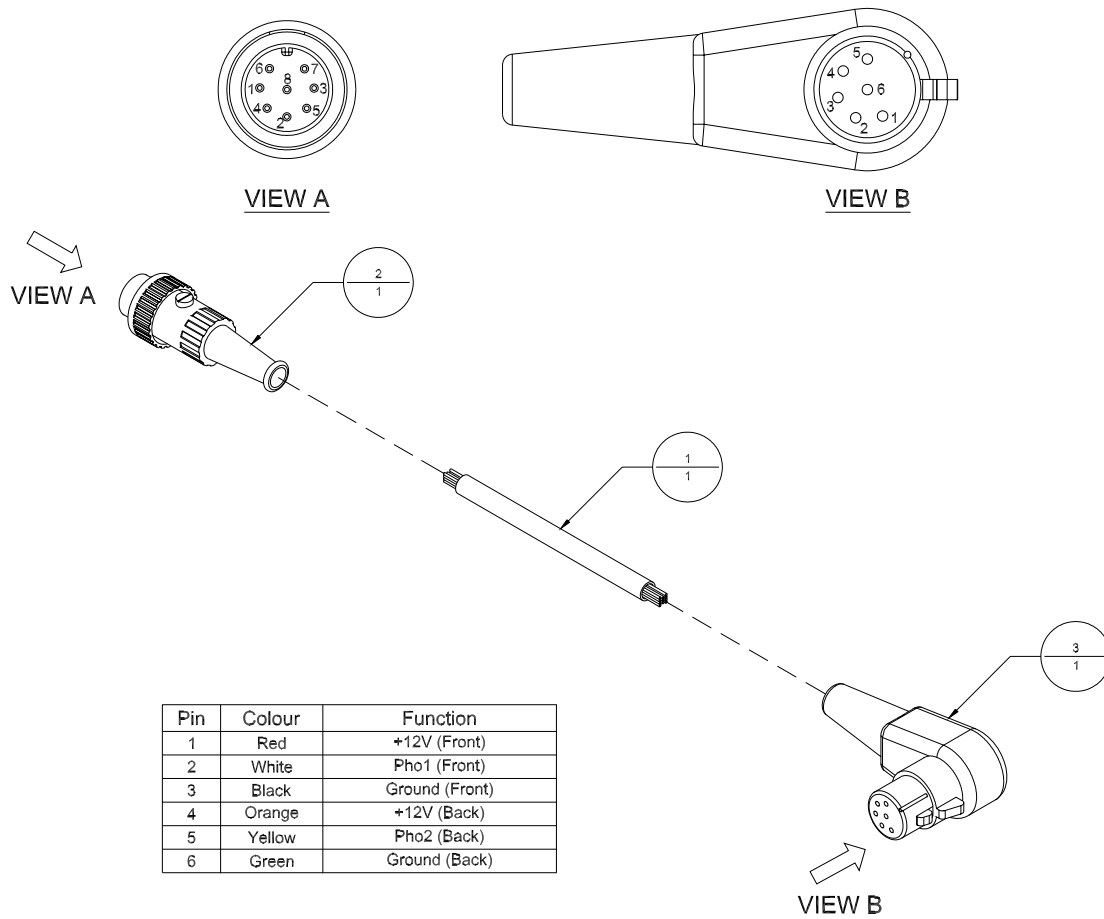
Photo F/B Cable Assembly, BK730 (9101659A)
